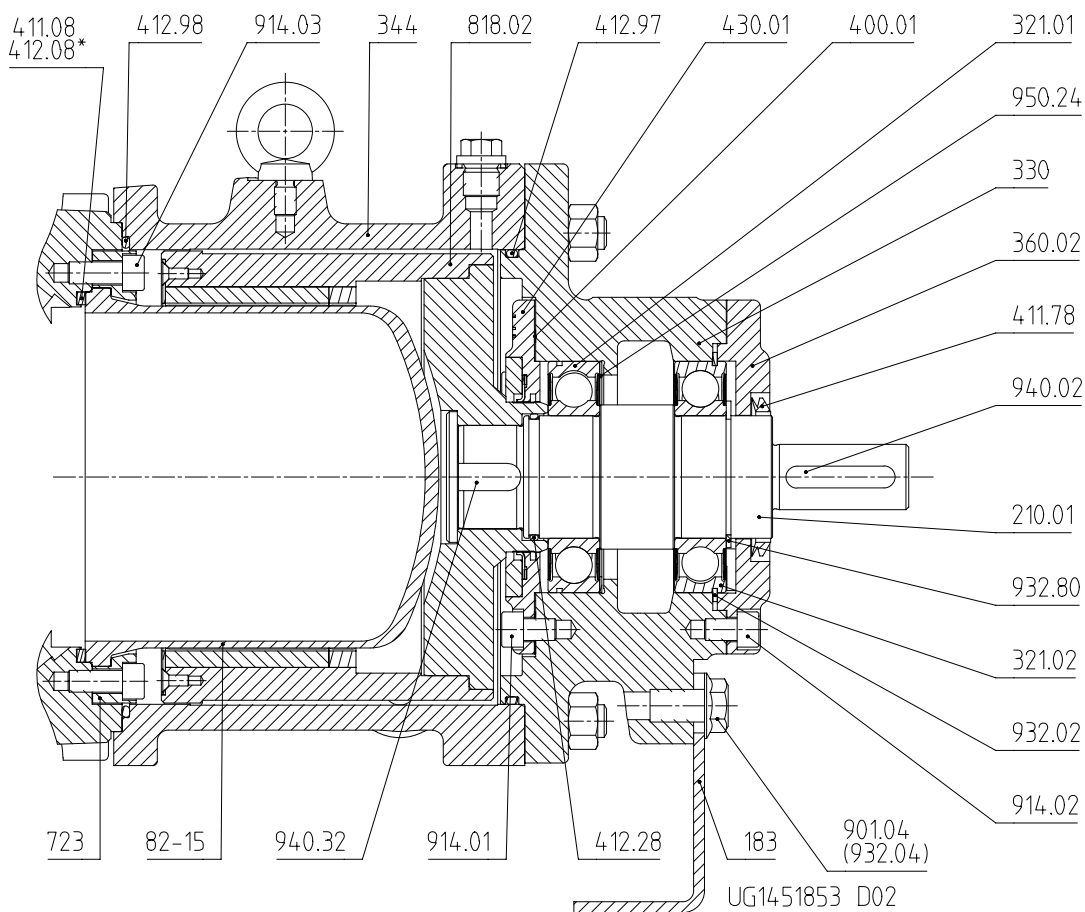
Model with bearing bracket with grease lubrication and shaft seal ring as leakage barrier
